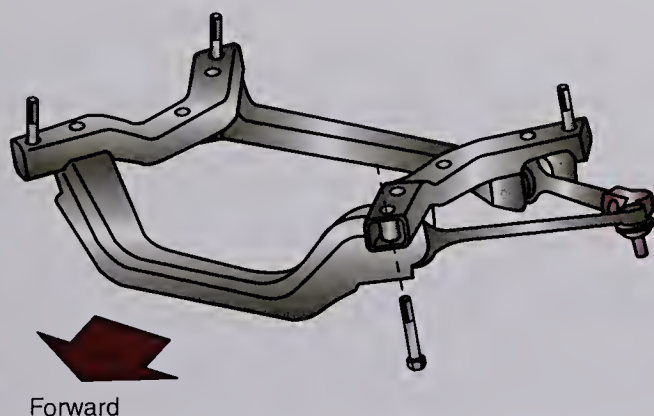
Loosening cradle mounting bolts and shifting the cradle to perform minor camber adjustments.
